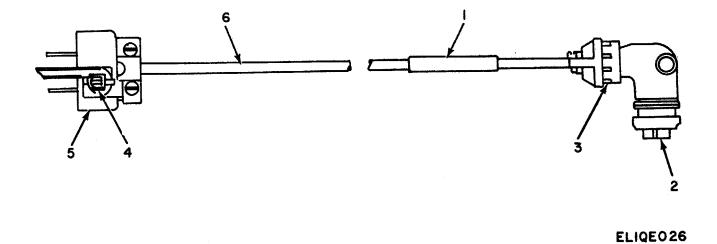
Cable Assembly, Power Electrical CX-7782/USM-159.
